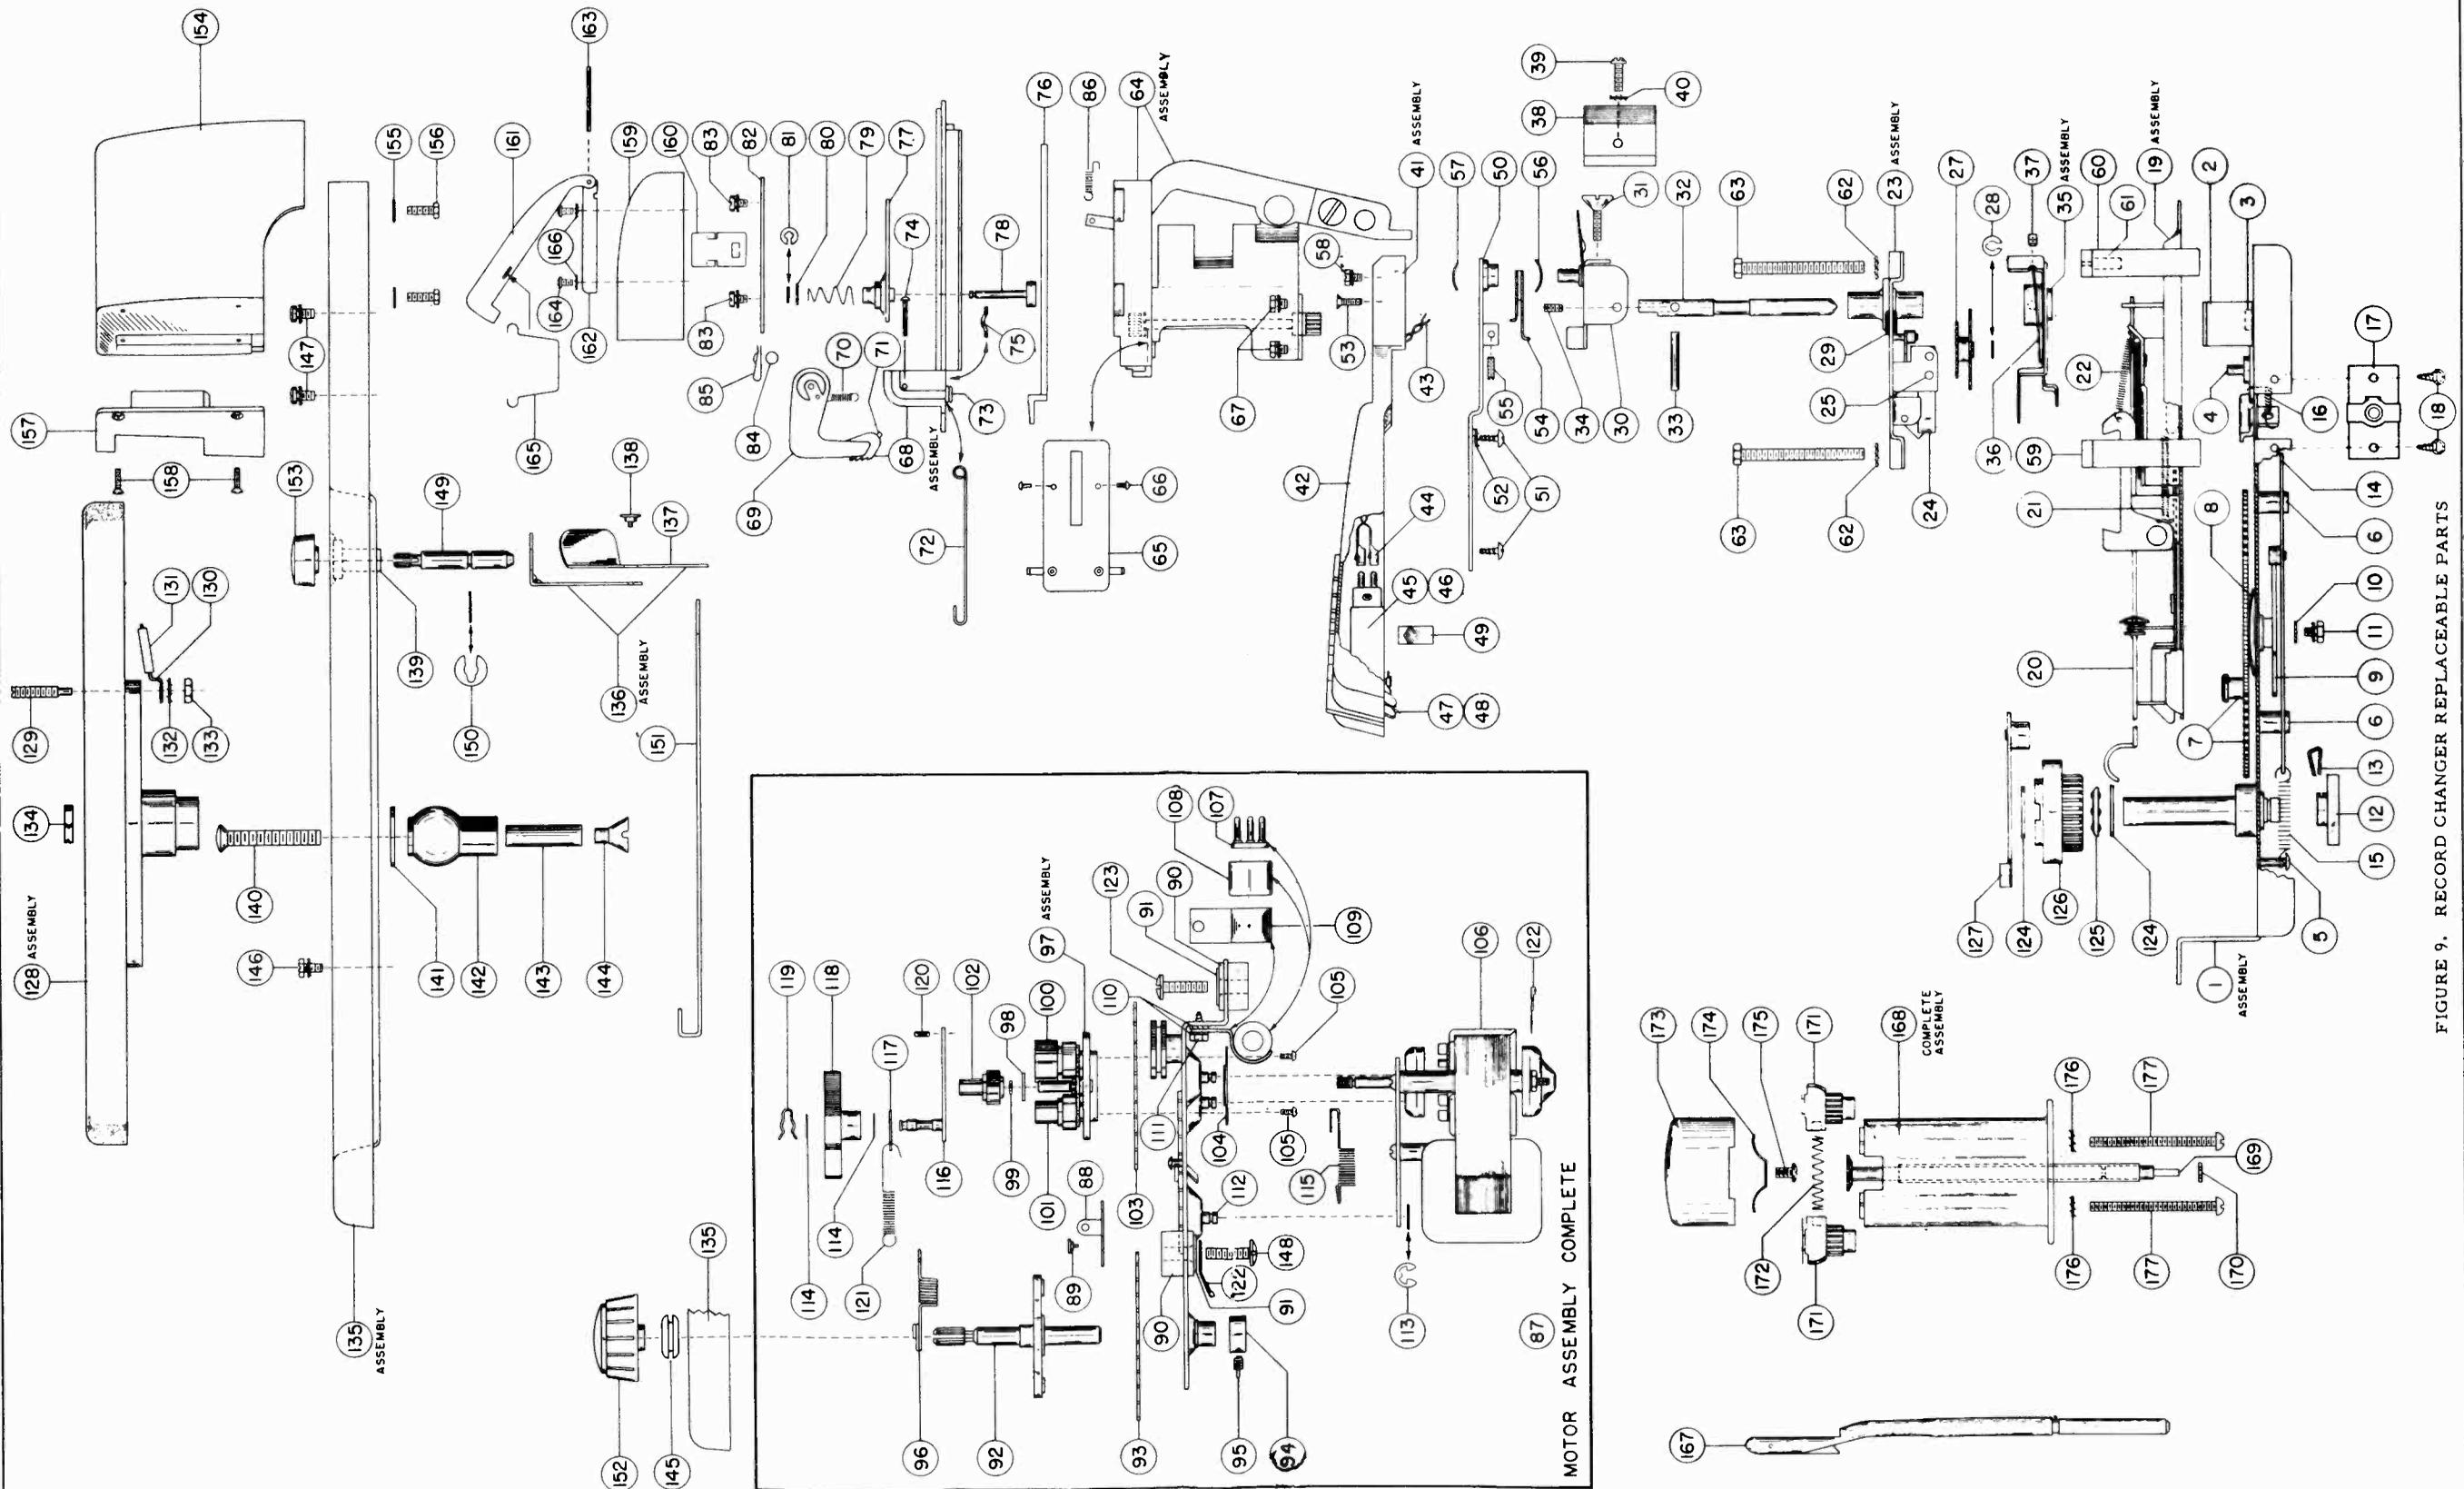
RECORD CHANGER REPLACEABLE PARTS
